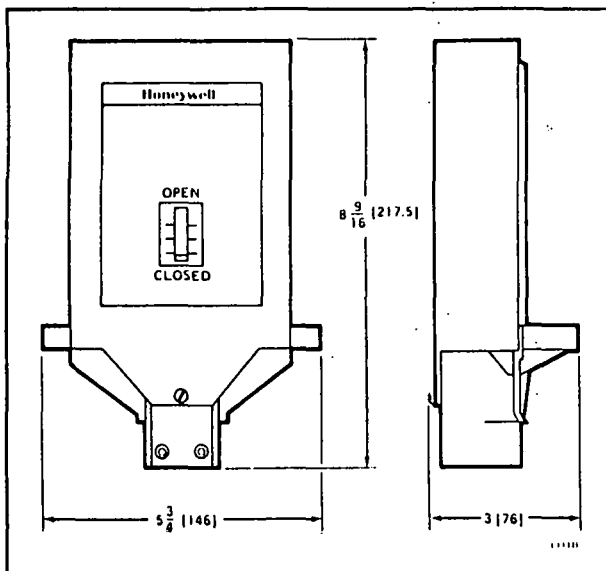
Q618 INSTALLATION DIMENSIONS, IN INCHES [MILLIMETERS SHOWN IN BRACKETS].
